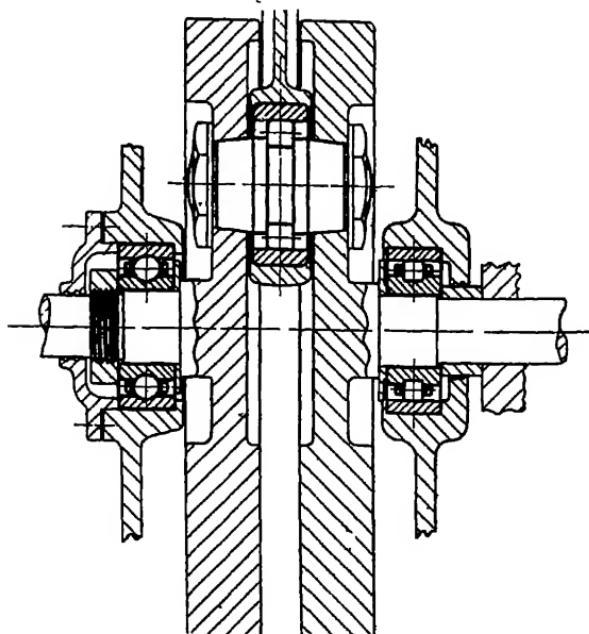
SHOWING BALL AND ROLLER BEARINGS APPLIED TO MOTOR-CYCLE ENGINE
